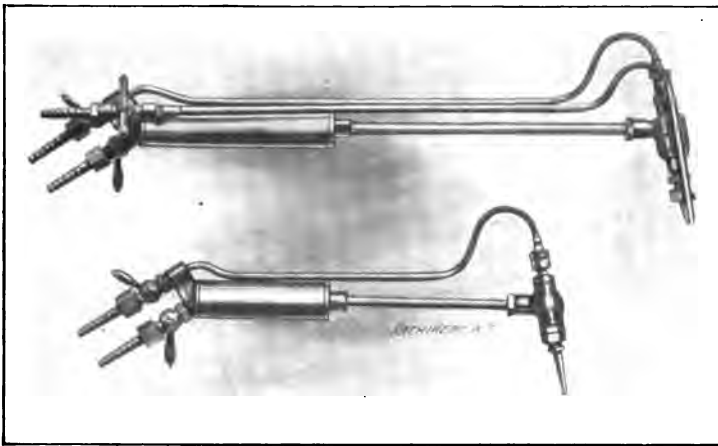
Davis-Bournonville Oxy-acetylene Cutting and Welding Torch
